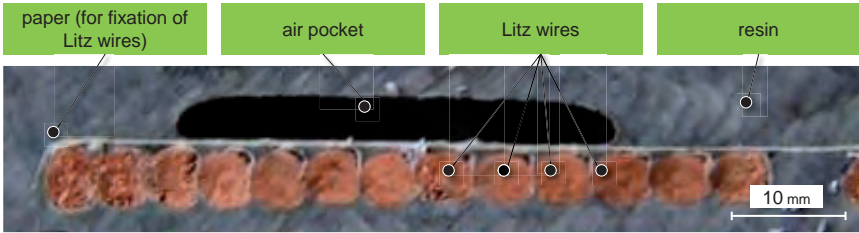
Air pocket in an AGV industrial CPT system with epoxy resin.
